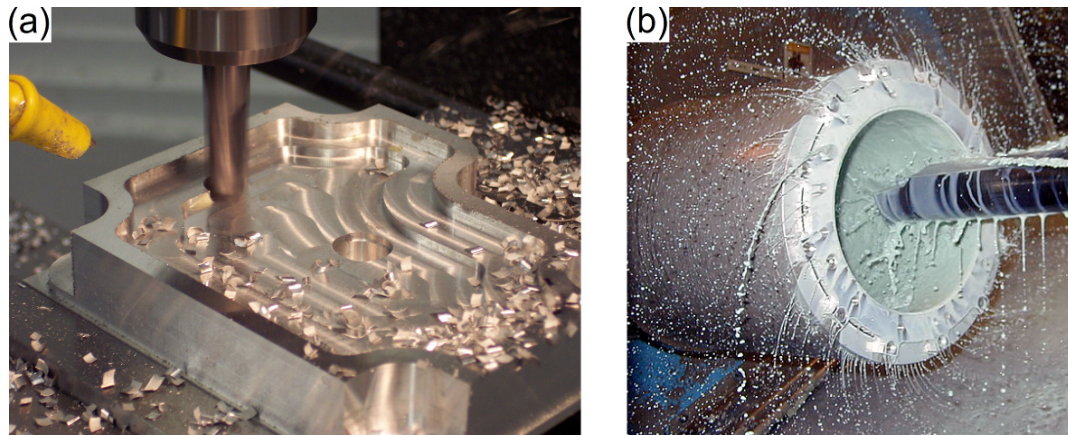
Machining examples: (a) milling [12]; (b) turning [13].
